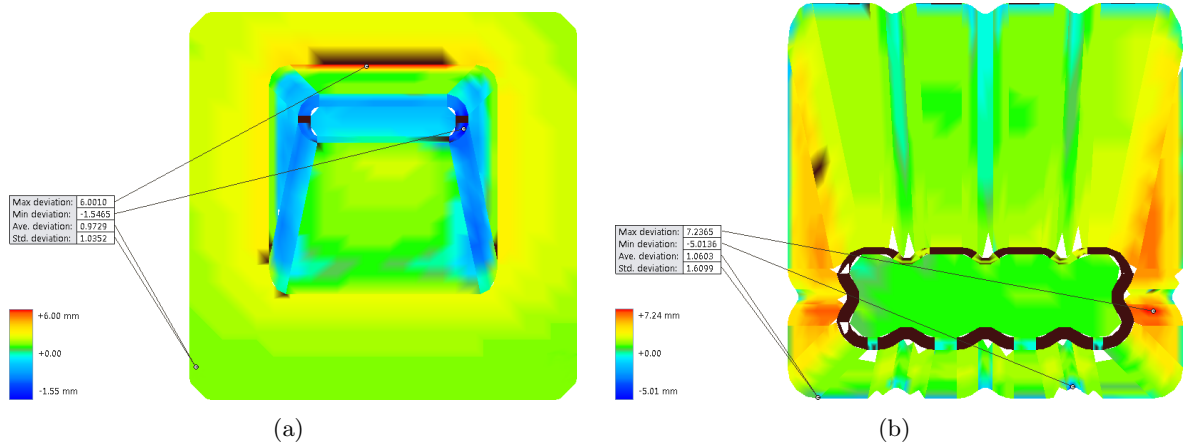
Sheet metal cork compression mould dimensional measurement results: (a) core side (b) cavity side
